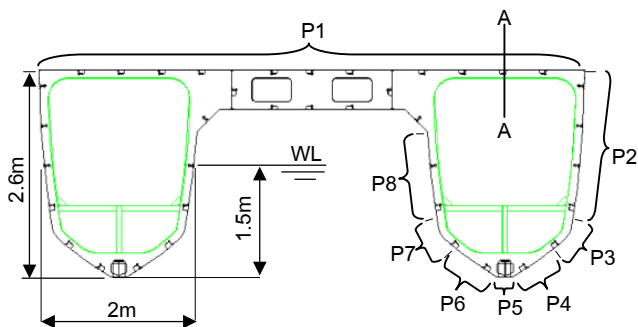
Transverse frame showing plate locations. View A-A is shown in Fig. 1-3.
